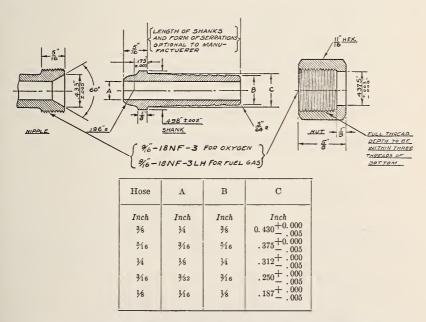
"B" size of standard hose connections for welding and cutting torches.
